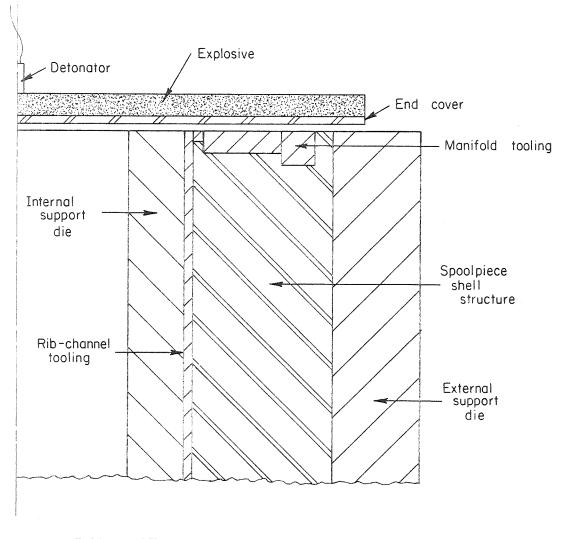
SETUP FOR WELDING END COVER PLATES TO SPOOLPIECE PLENUM SURFACES
